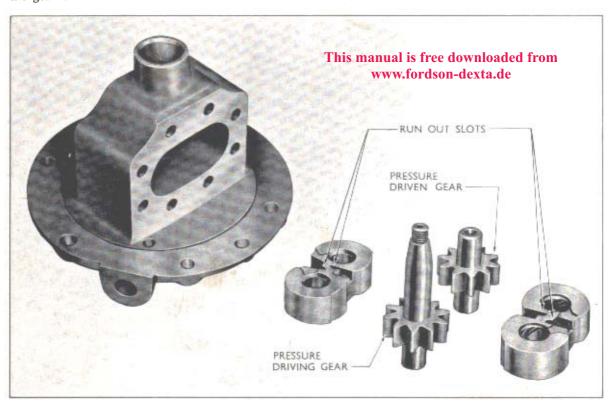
Hydraulic Pump Body, Bearings and Gears
